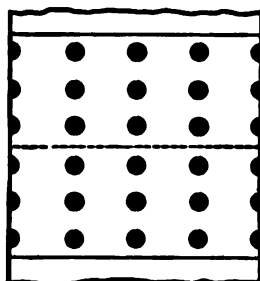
Treble-riveted butt-joint chain-riveted.
